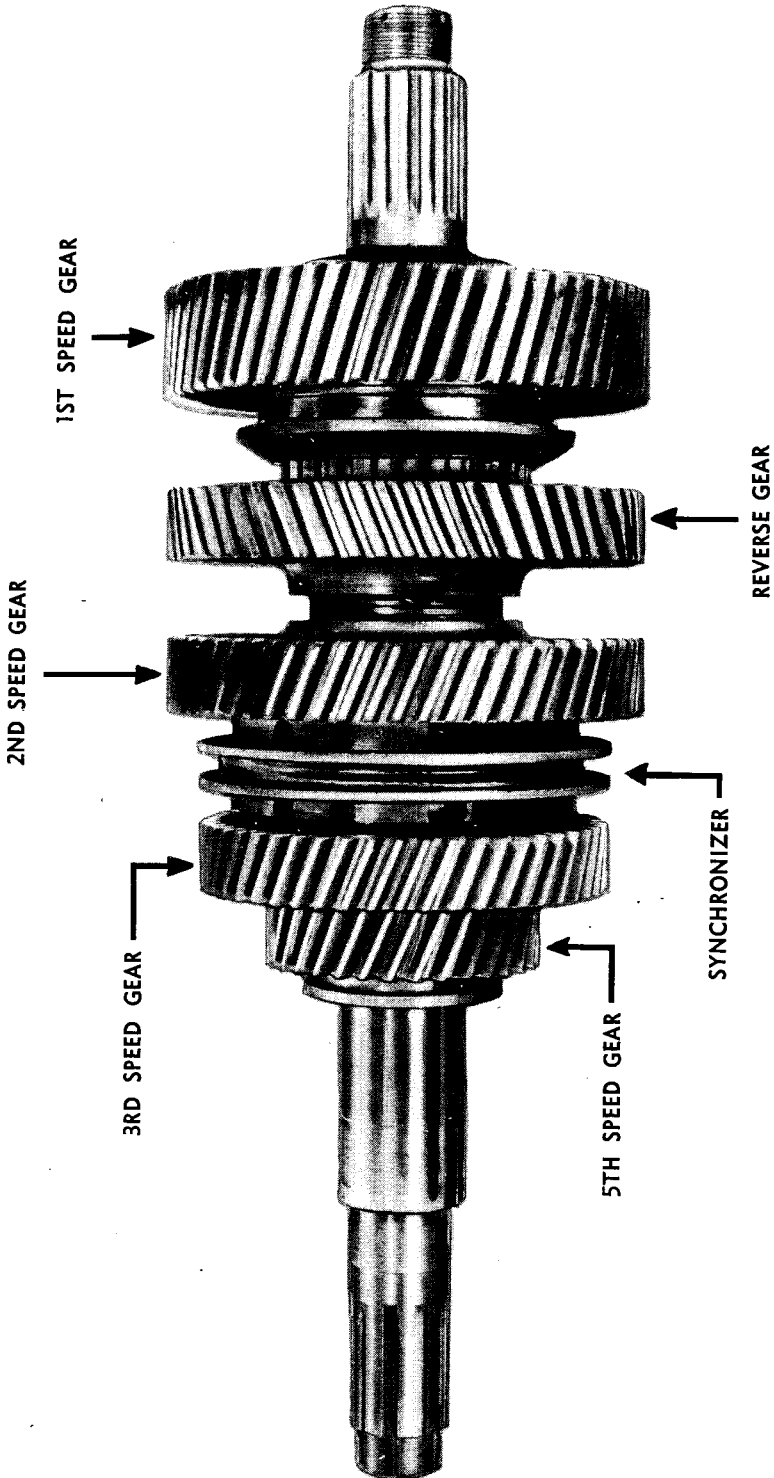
OUTPUT SHAFT ASSEMBLY
